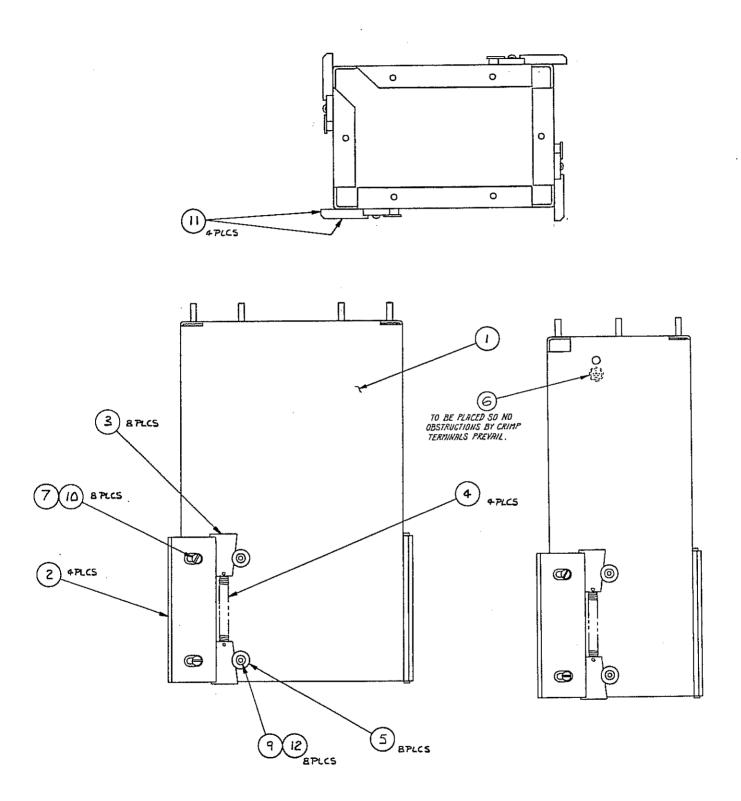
PARTS LOCATION DIAGRAM, INNER COLUMN ASSEMBLY
